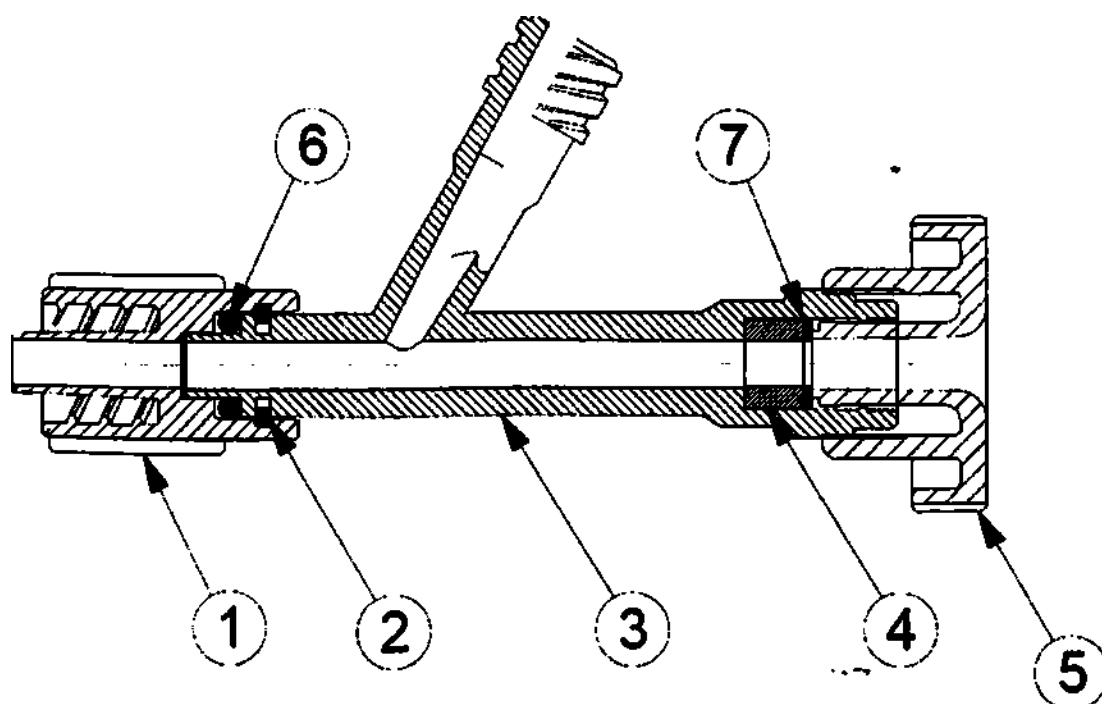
Device structure: ANRYV Sterile Disposable Y-Shaped Connector with Two Adapters (1. Sliding nut; 2. Sealing ring for the sliding nut; 3. Y-connector shaft; 4. Molded valve; 5. Valve nut; 6. O-ring; 7. Valve ring).
